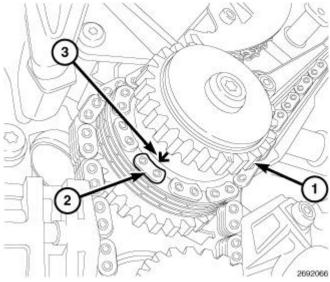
Phaser Timing Marks, Oil Control Valves & LH Camshaft Phaser Lock Courtesy of CHRYSLER GROUP, LLC
